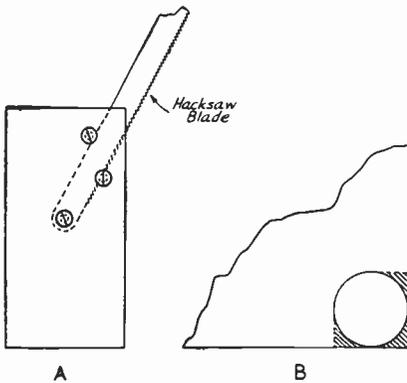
To cut rectangular holes in a chassis corner, holes may be filed out as shown in the shaded portion of B, making it possible to start the hack-saw blade along the cutting line. A shows how a single-ended handle may be constructed for a hack-saw blade.
